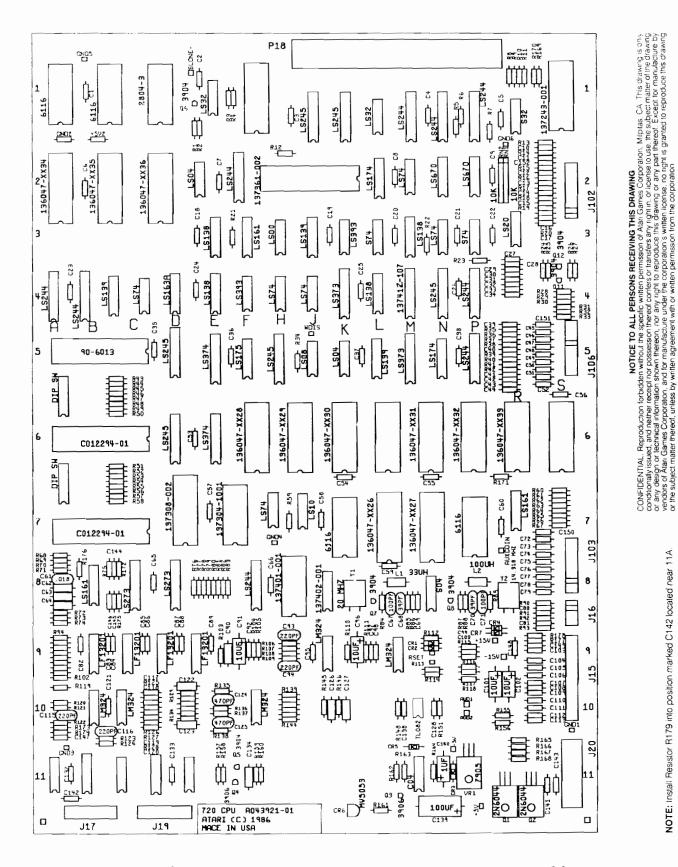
720° Central Processing Unit (CPU) PCB Assembly A043921-01 A
